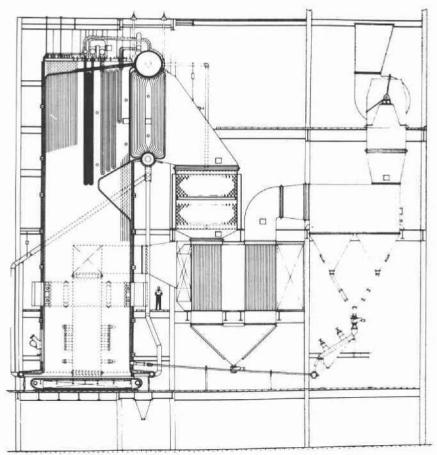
Steam boiler at a Louisiana paper company, designed to burn hogged bark with a spreader stoker. The plant can generate 450,000 pounds of steam per hour (drawing courtesy of Combustion Engineering, Inc.).
